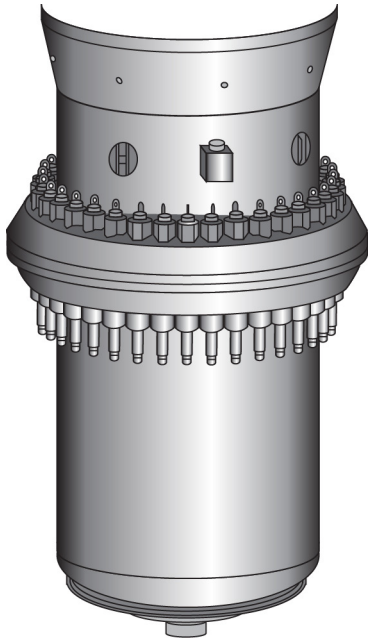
Lower Assembly, including the lower head, lower RPV flange shell, and upper RPV transition shell.
